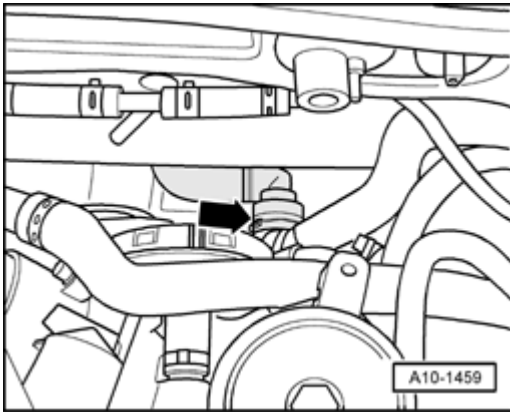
Disconnecting Coolant Hose To Heater Core At Rear Coolant Pipe On Engine
